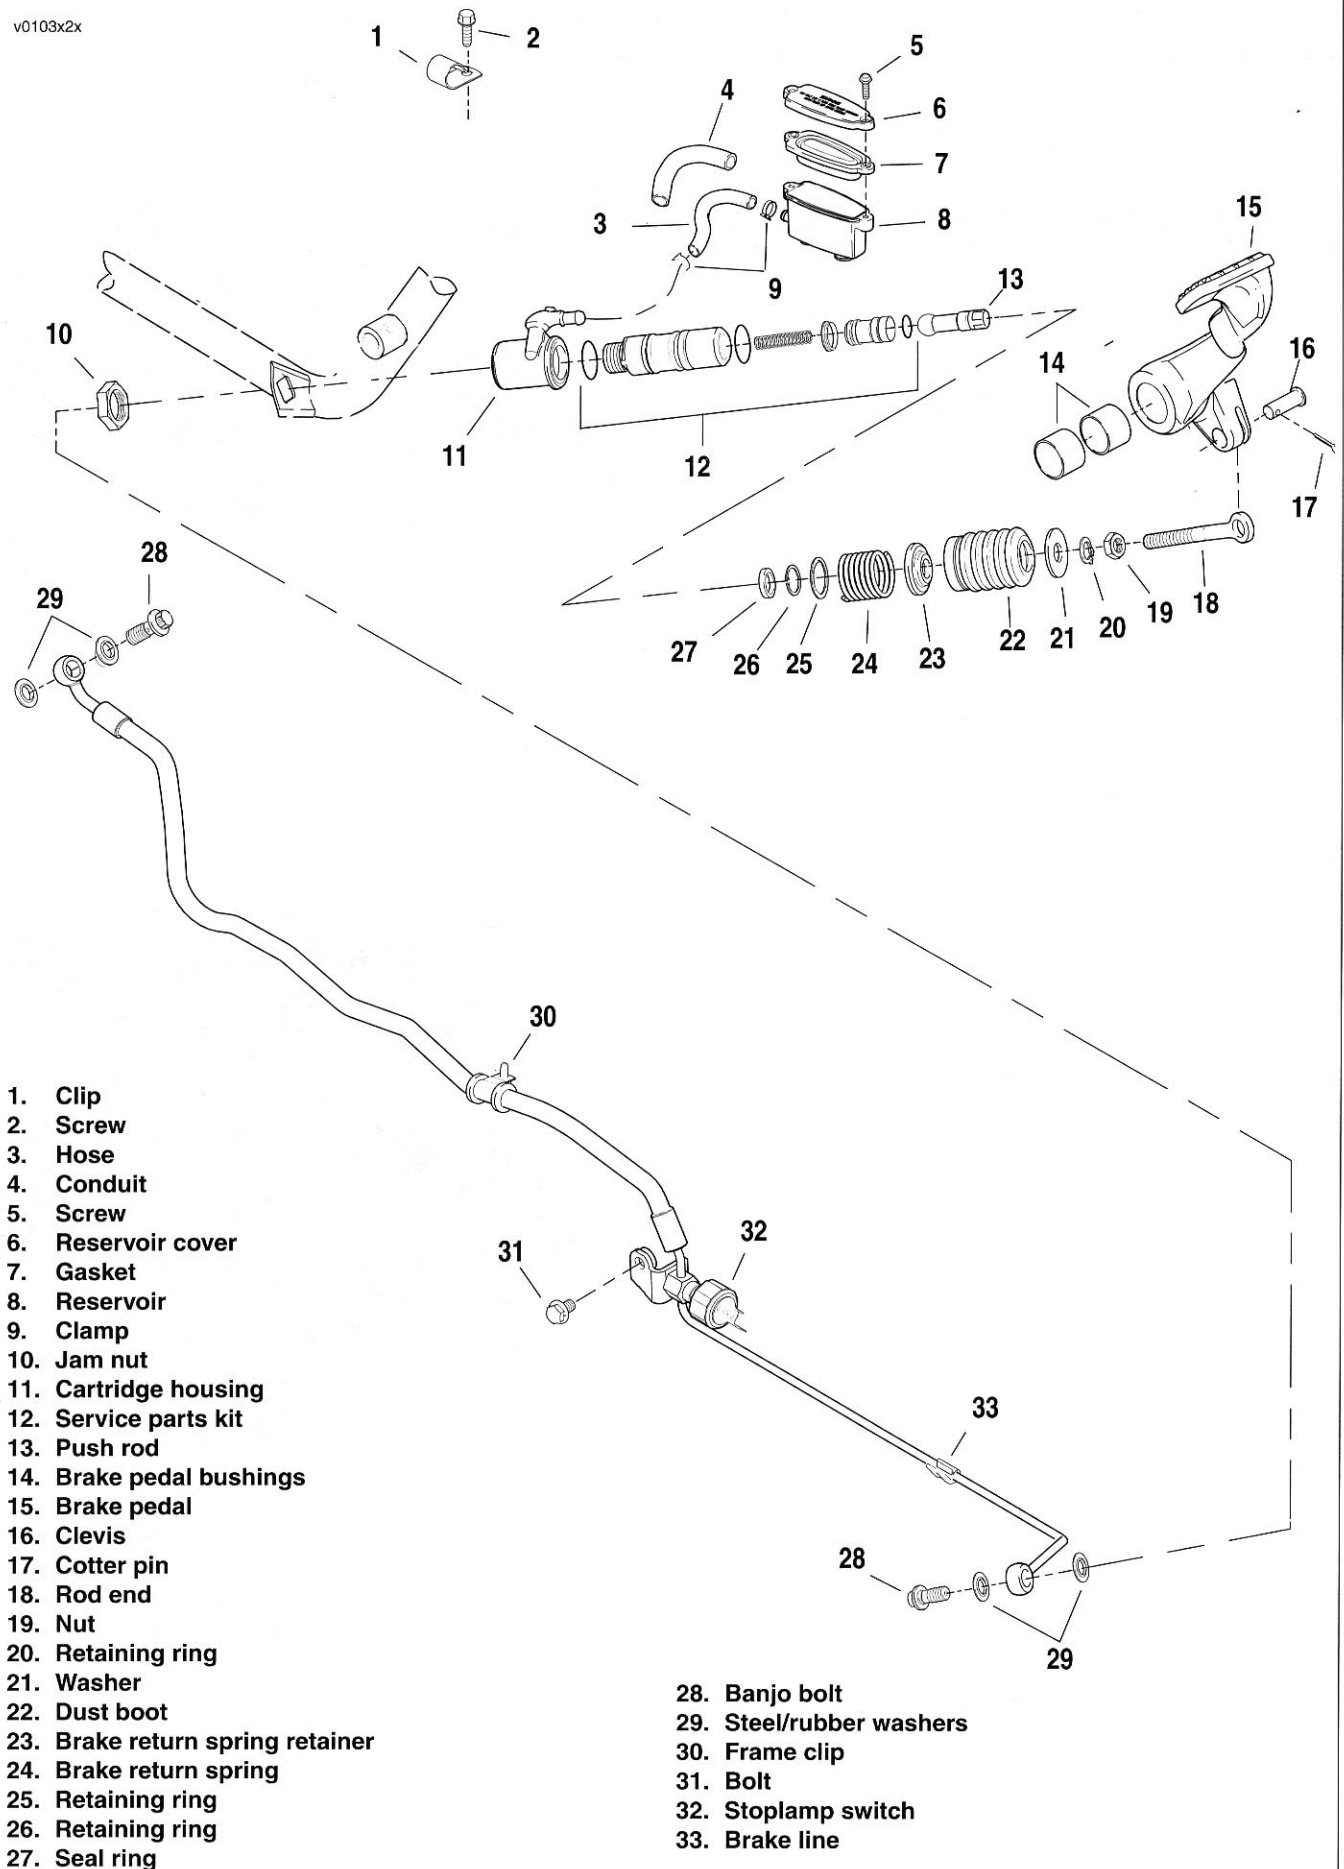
Rear Brake Master Cylinder/Reservoir
